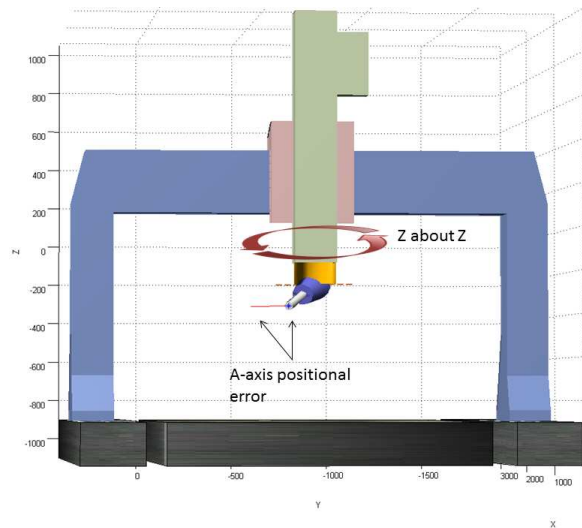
Z about Z error resulting in A-axis positional error on a five-axis gantry machine tool
